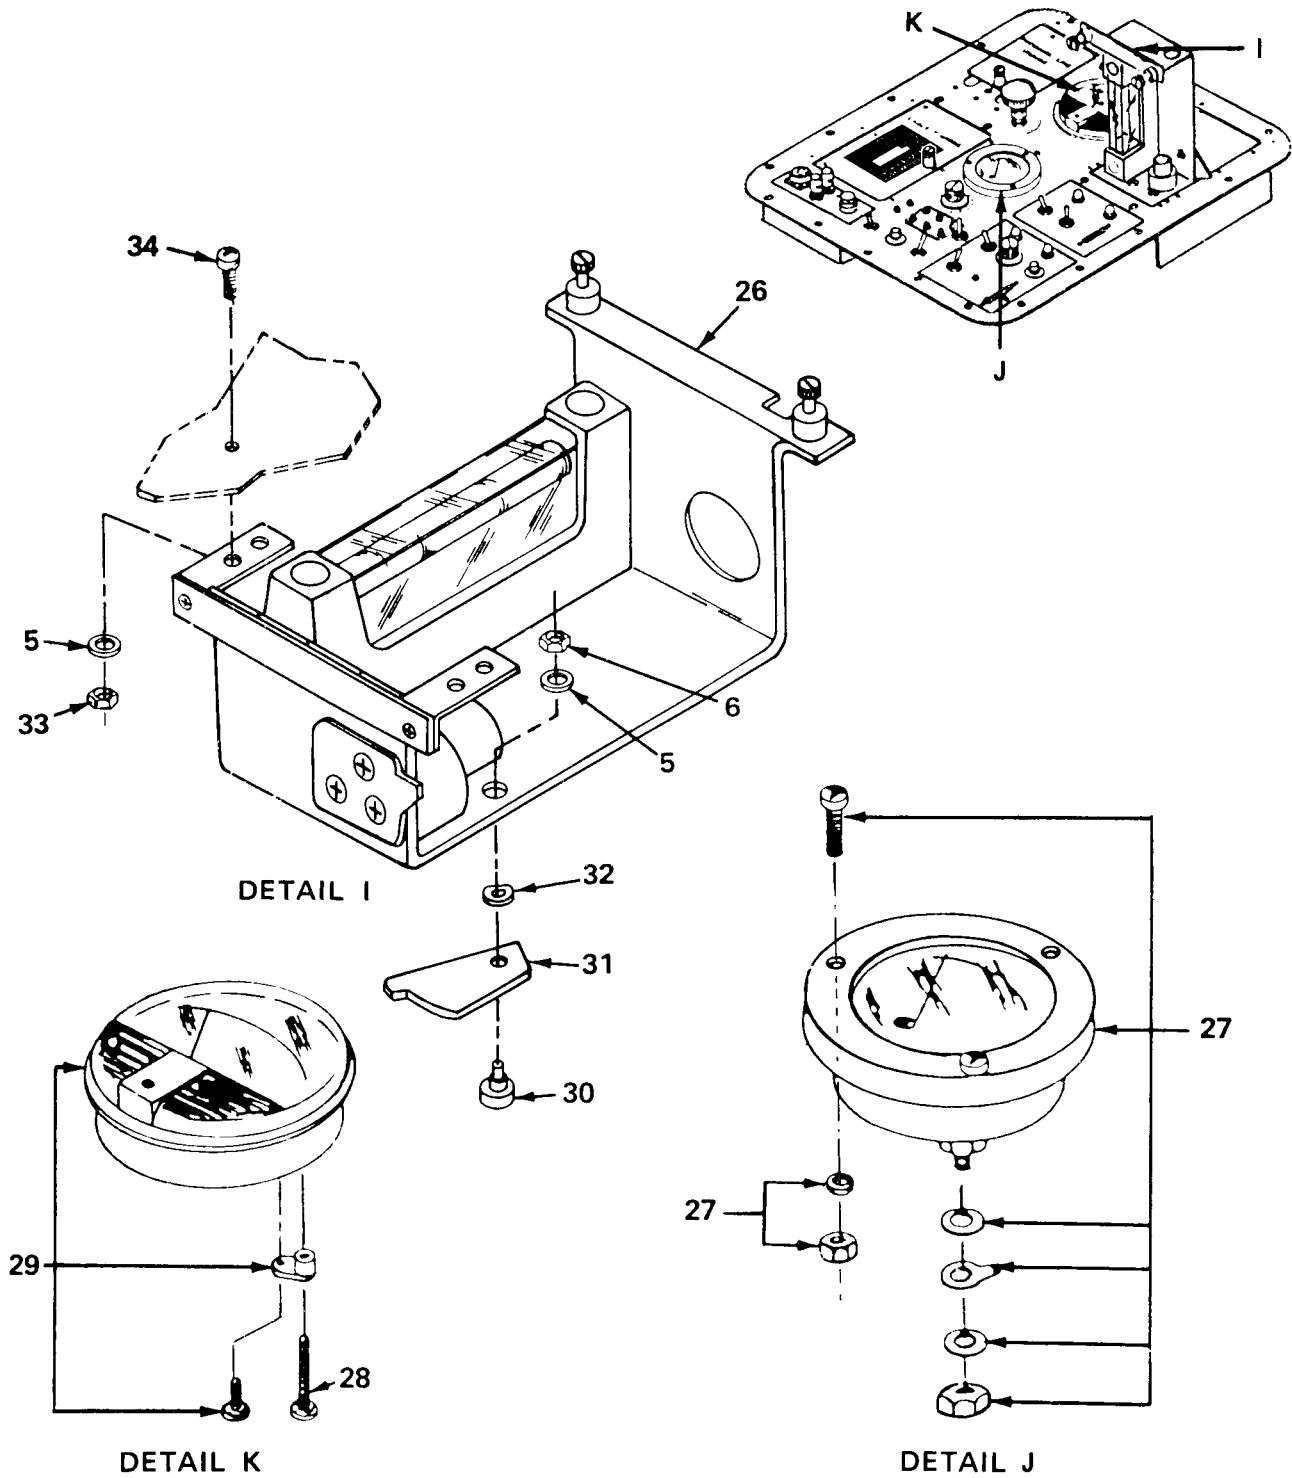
, Group 02. Test Set Panel Assembly (Sheet 2 of 7)
